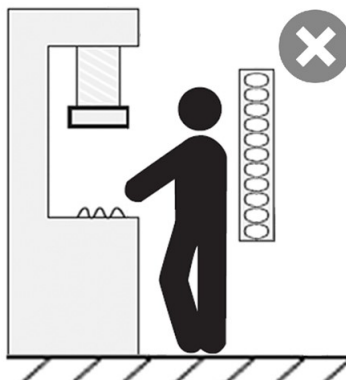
The operator is between the sensor's detection zone and the hazardous zone of a machine.
